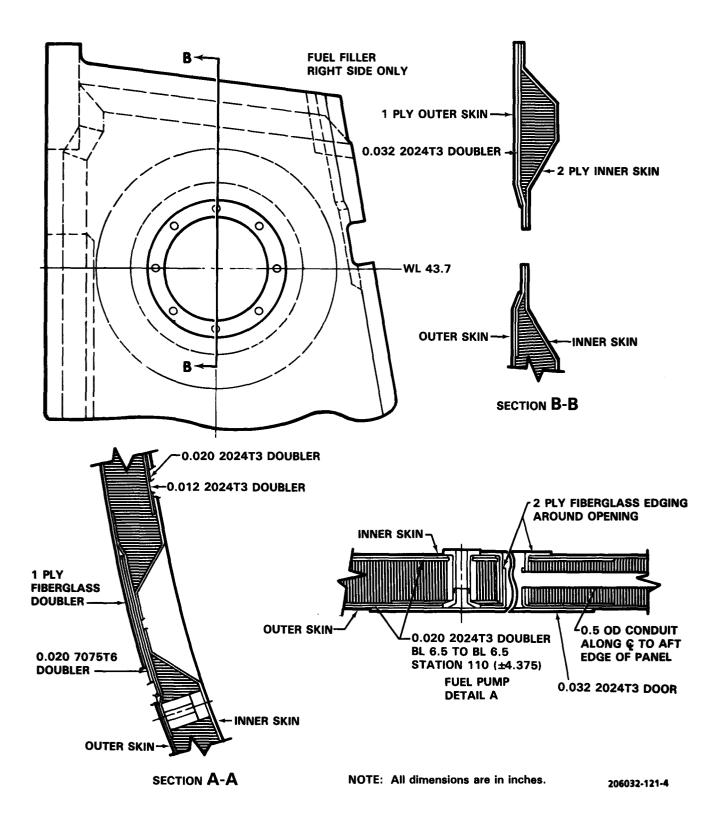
Honeycomb Panel — Aft Lower Cabin Shell Repair (Sheet 4)
